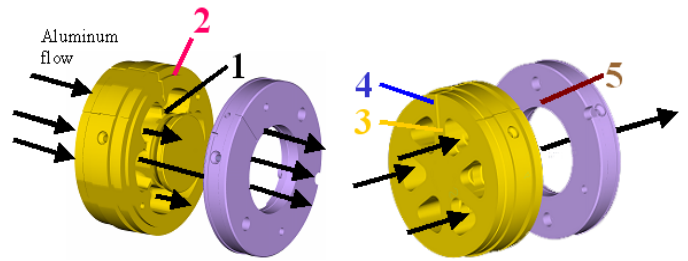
Instrumented tube (\varnothing 250mm) die. Thermocouples are inserted at positions 1 through 5
